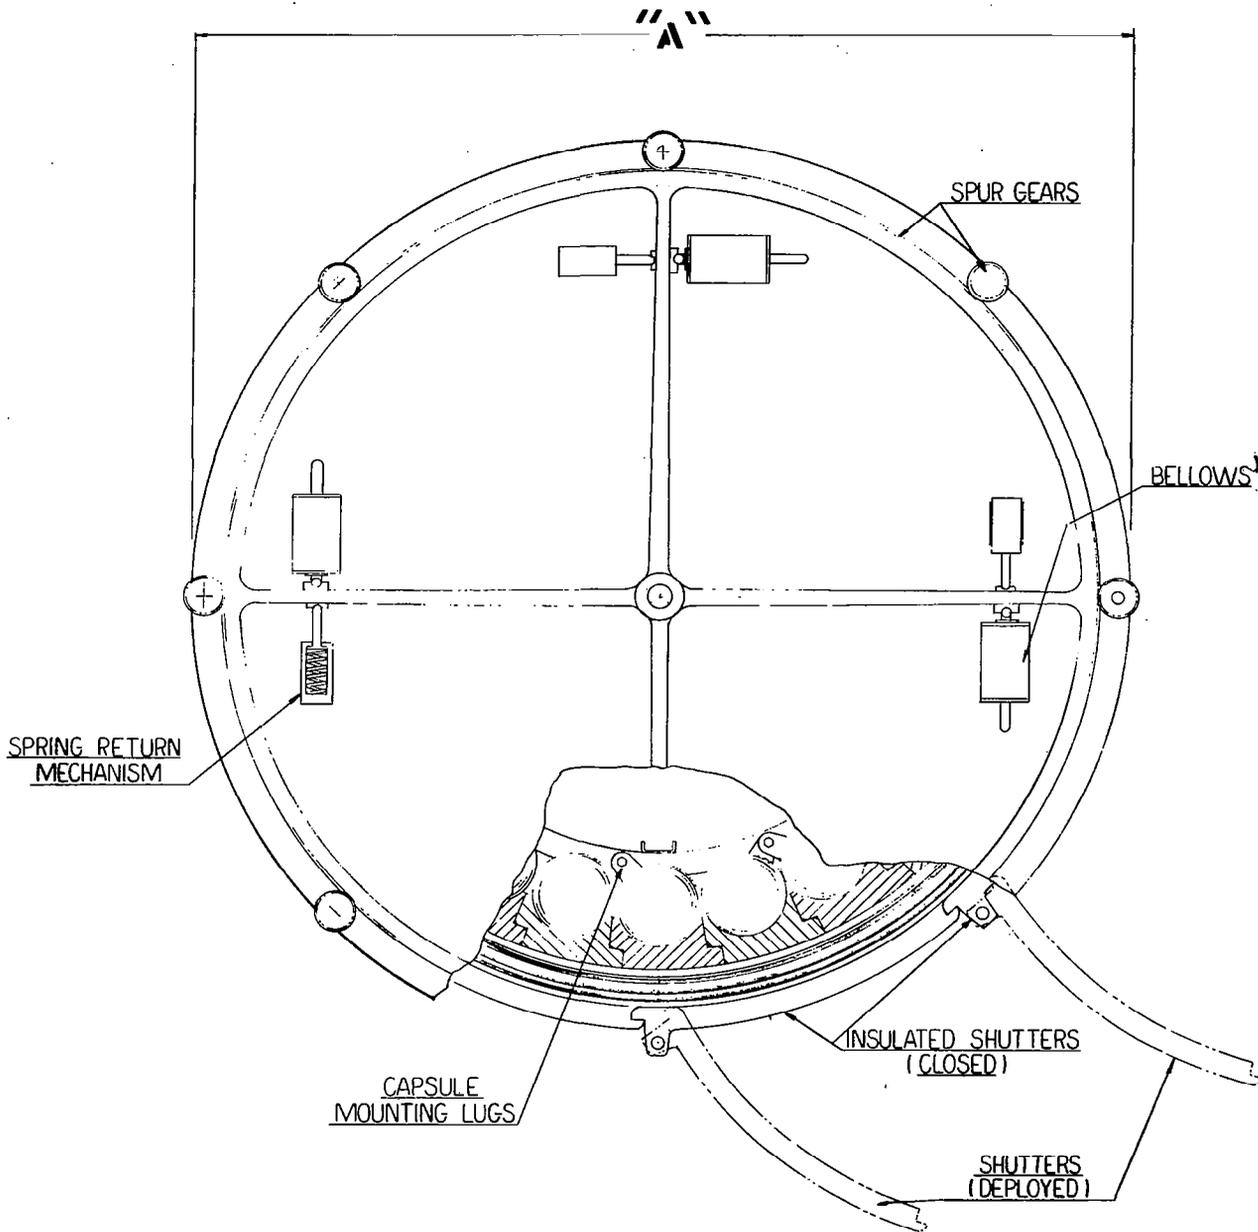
Mercury-Rankine Heat Source and Heat Exchanger Module - End View
